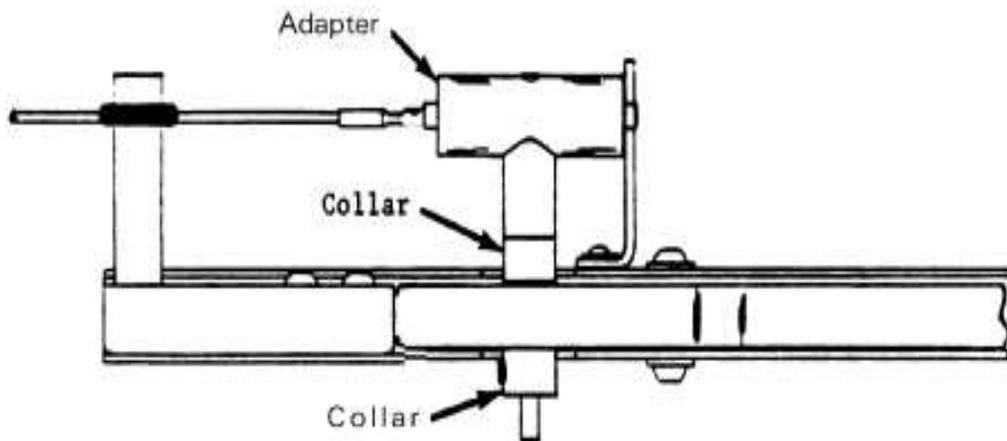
Adapter Installation on AD-1567 Holding Fixture
